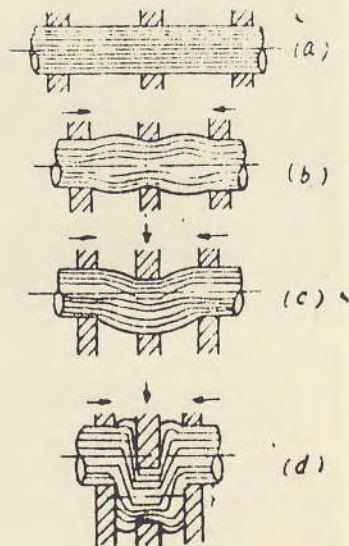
Manufacturing process of crankshaft by R-R forging method
